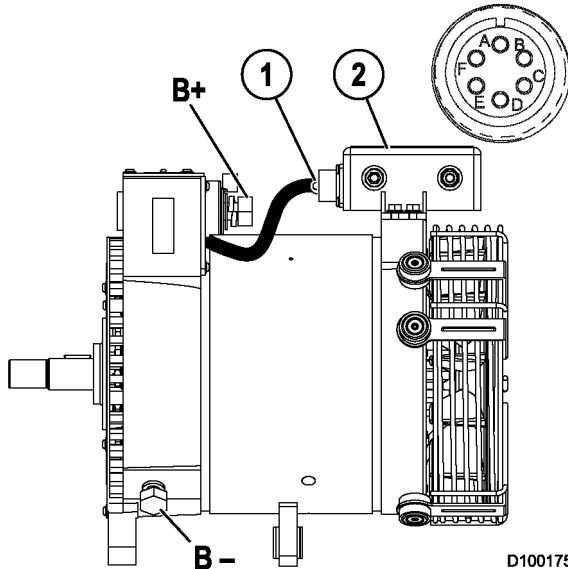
WIRING HARNESS PLUG JUMPER WIRE CONNECTION
